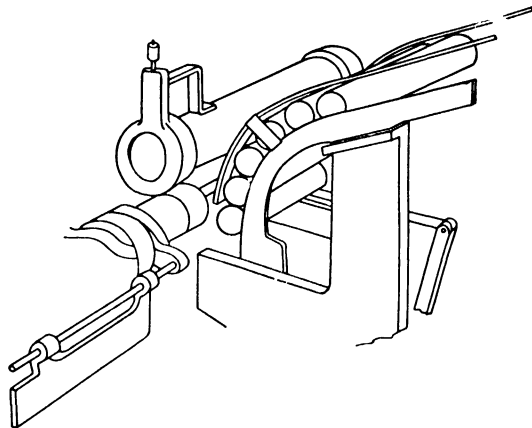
The first trimming operation is made in an automatic magazine-feed machine after the third redraw. A photograph of this machine is shown on Plate XXXI, page 439.
